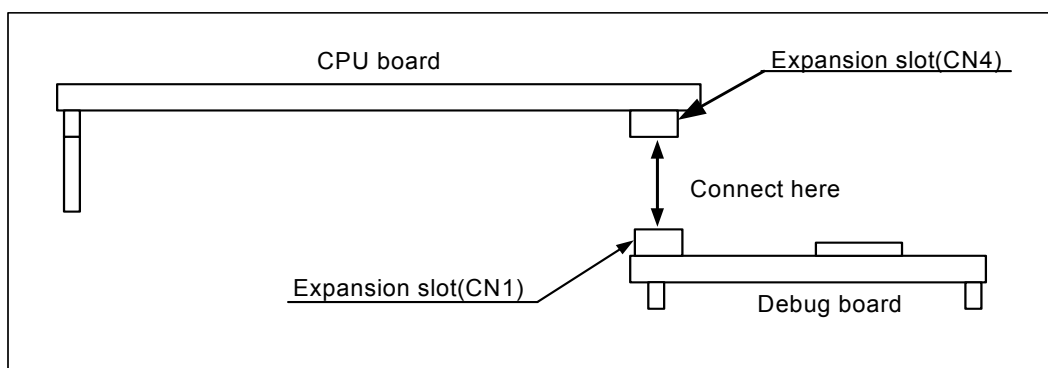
Connecting the Debug Board to the μ T-Engine Board
